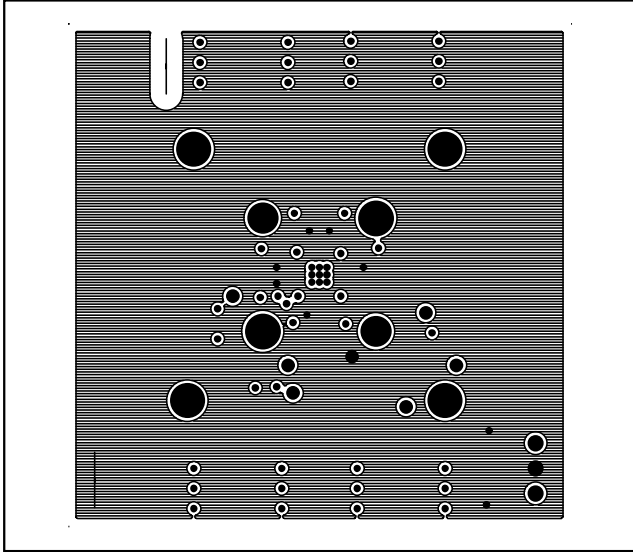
MAX3801 EV Kit PC Board Layout—Power Plane
